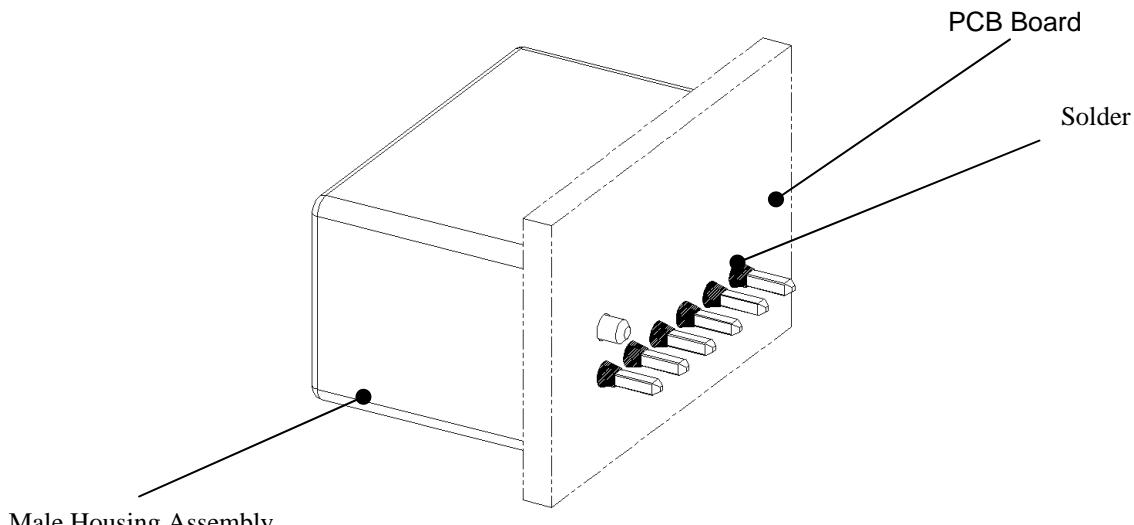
Placing the Male Assembly on the PCB Board (e.g. 6 positions)
